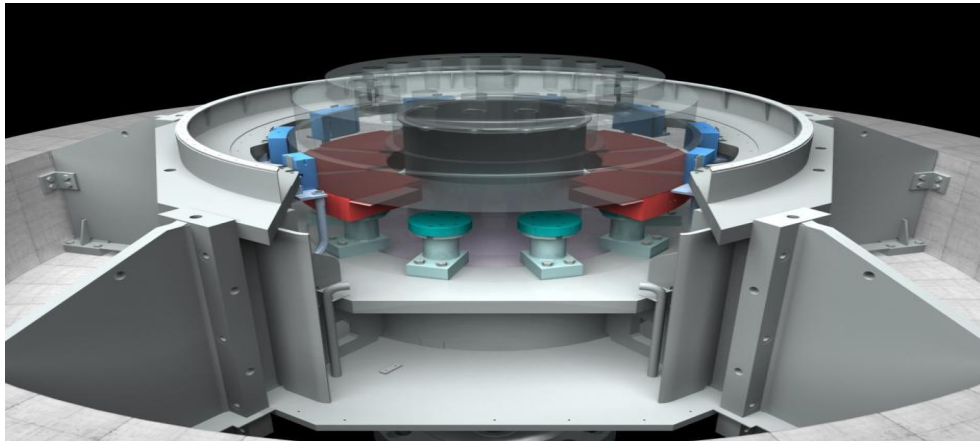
Thrust bearing of a large hydro generator unit (ALSTOM Hydro)
